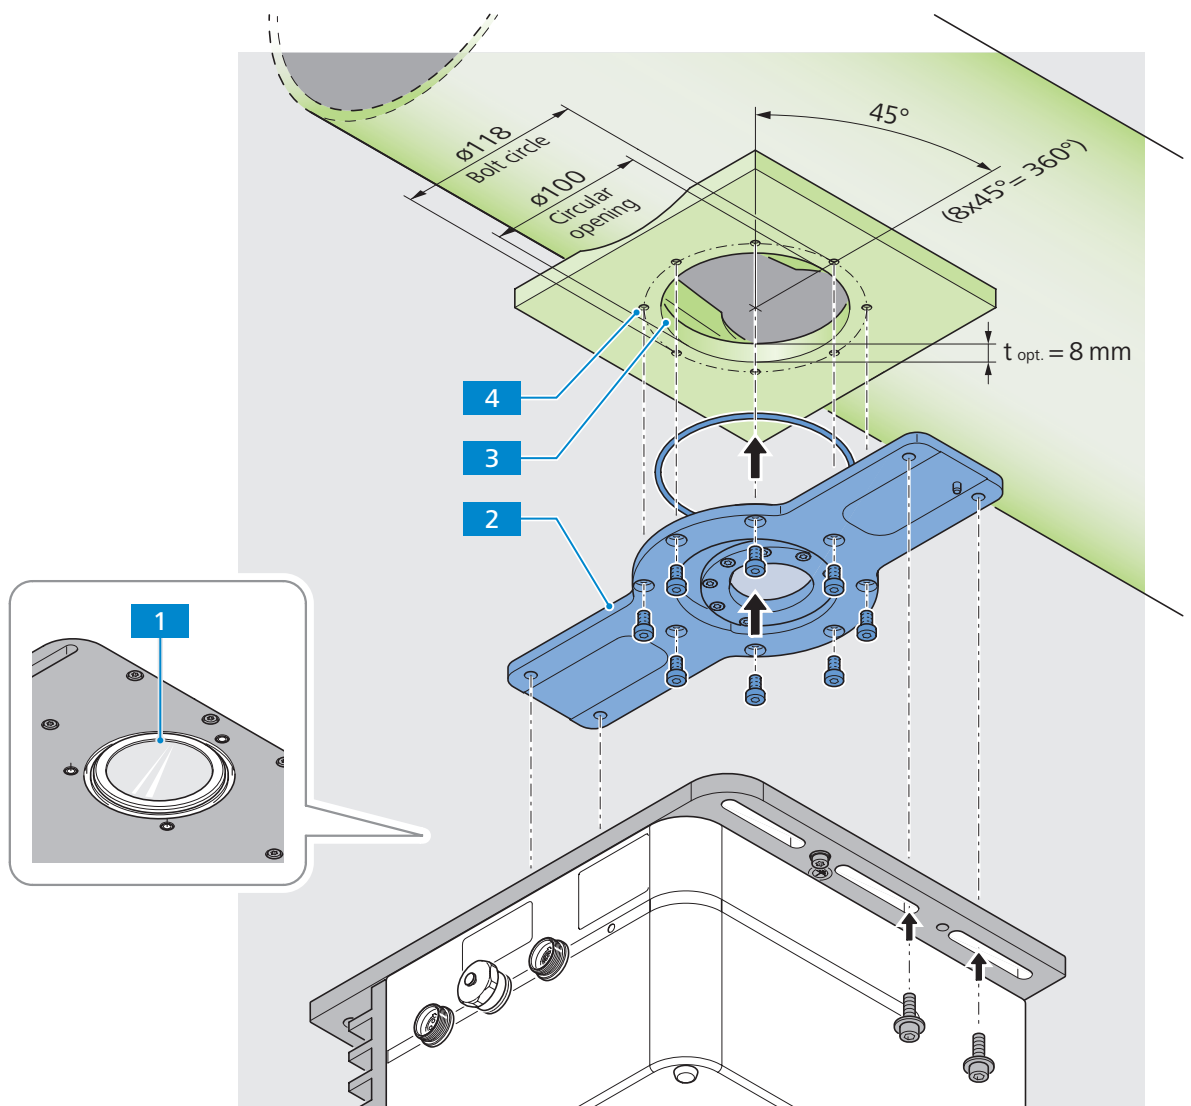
Corona extreme – mounting with power flange or standard flange ST
